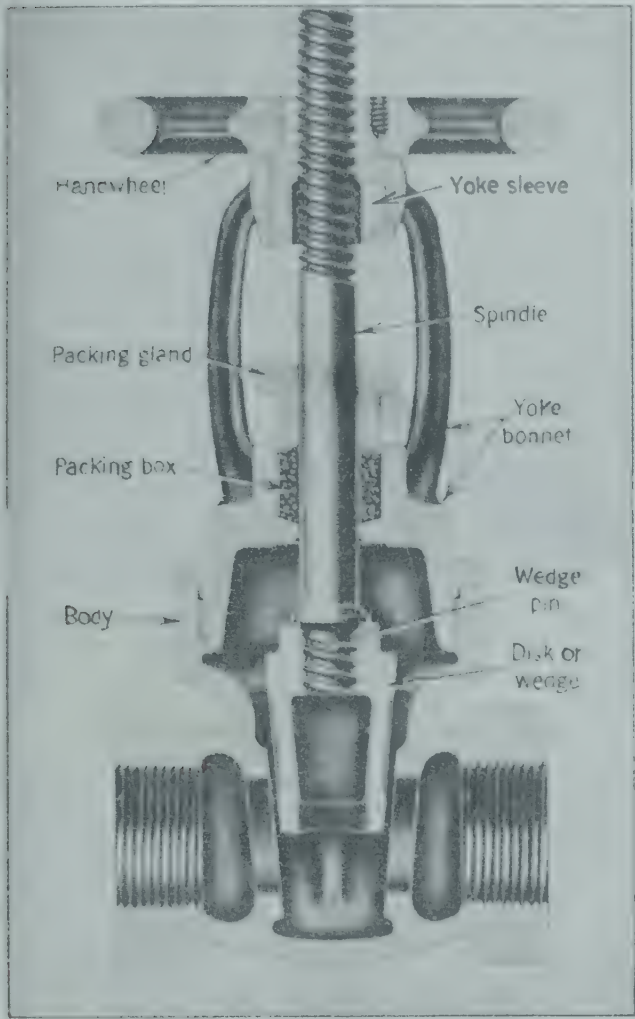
Sectional view of gate valve with rising spindle and outside screw and yoke. (Jenkins Bros.)
